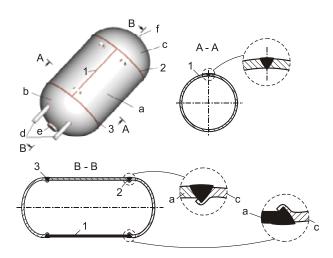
Representation of water heater: a - heater shell; b, c - heater end; d - connecter for the water; e, f - adapter, 1 - longitudinal weld at shell; 2, 3 - circumferential welds between shell and ends
